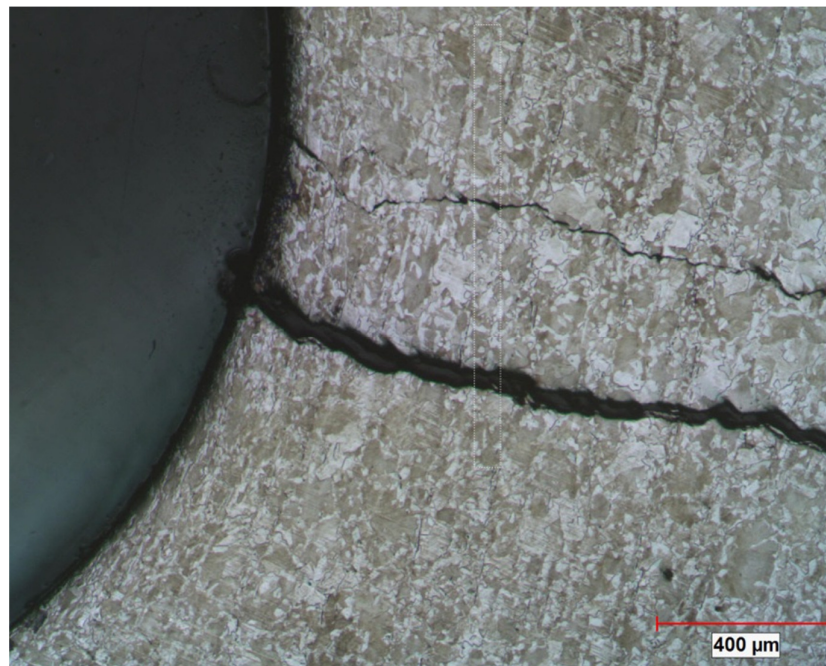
Primary and a secondary crack on a 38MnVS6 crankshaft sample rolled at 12.5kN.
